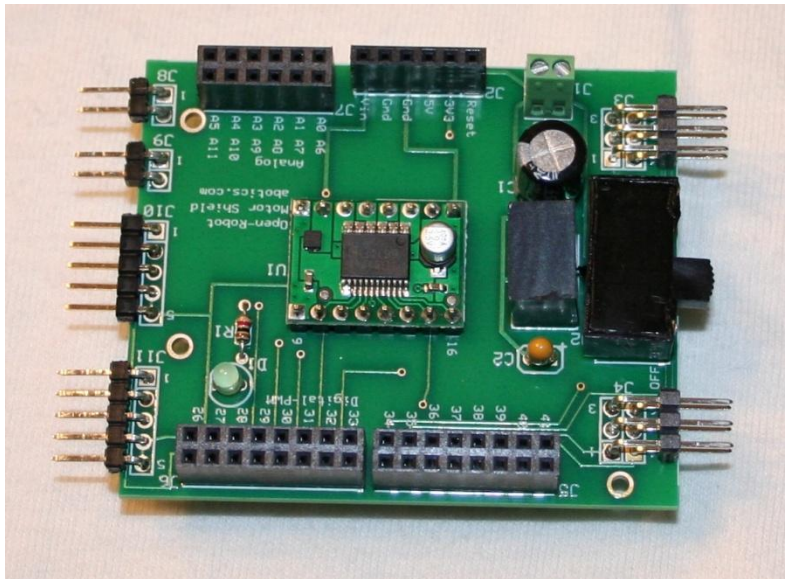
Solder 5x1 Right Angle Connectors, J10 & J11.
